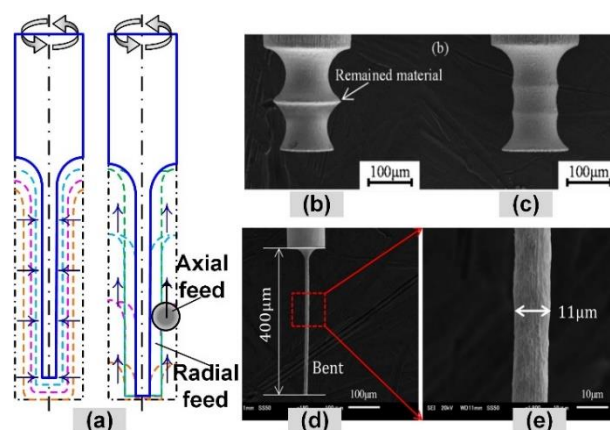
(a) Typical geometries of the micro-tools machined by WECG; micro-rods machined with different feed intervals (b) 100 μm , (c) 50 μm (Han and Kunieda, 2018); (d) Micro-tool with a minimum diameter of 11 μm ; (e) Enlargement of the tool tip (Han and Kunieda, 2020).
